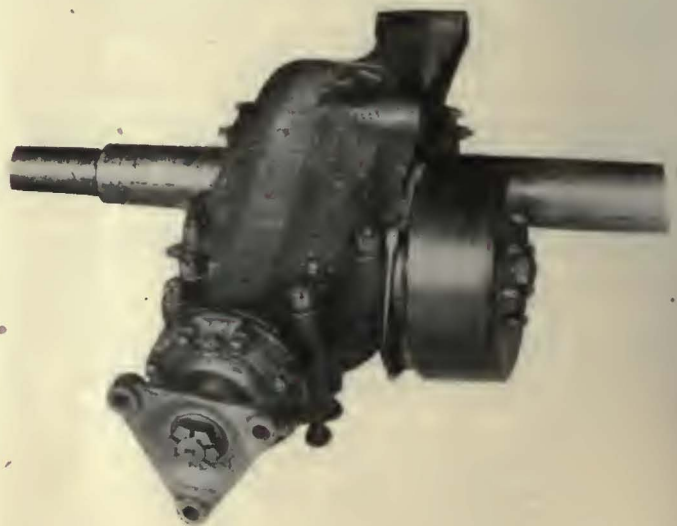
Cardan-Drive Gearing Shown in Fig. 17, but with Cover in Place
